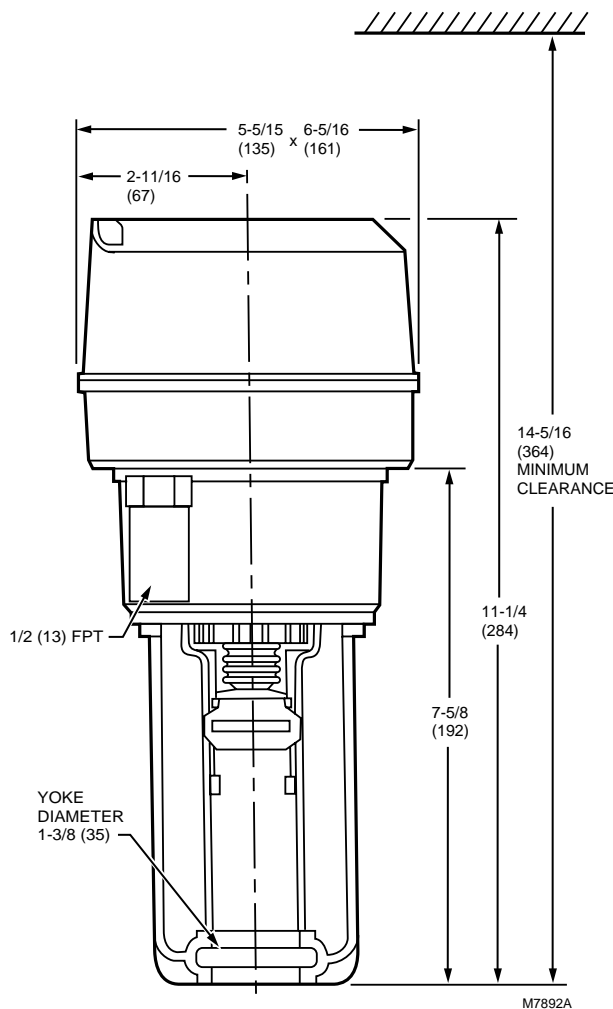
Approximate dimensions of ML7425A,B Electric Linear Valve Actuator in in. (mm).
